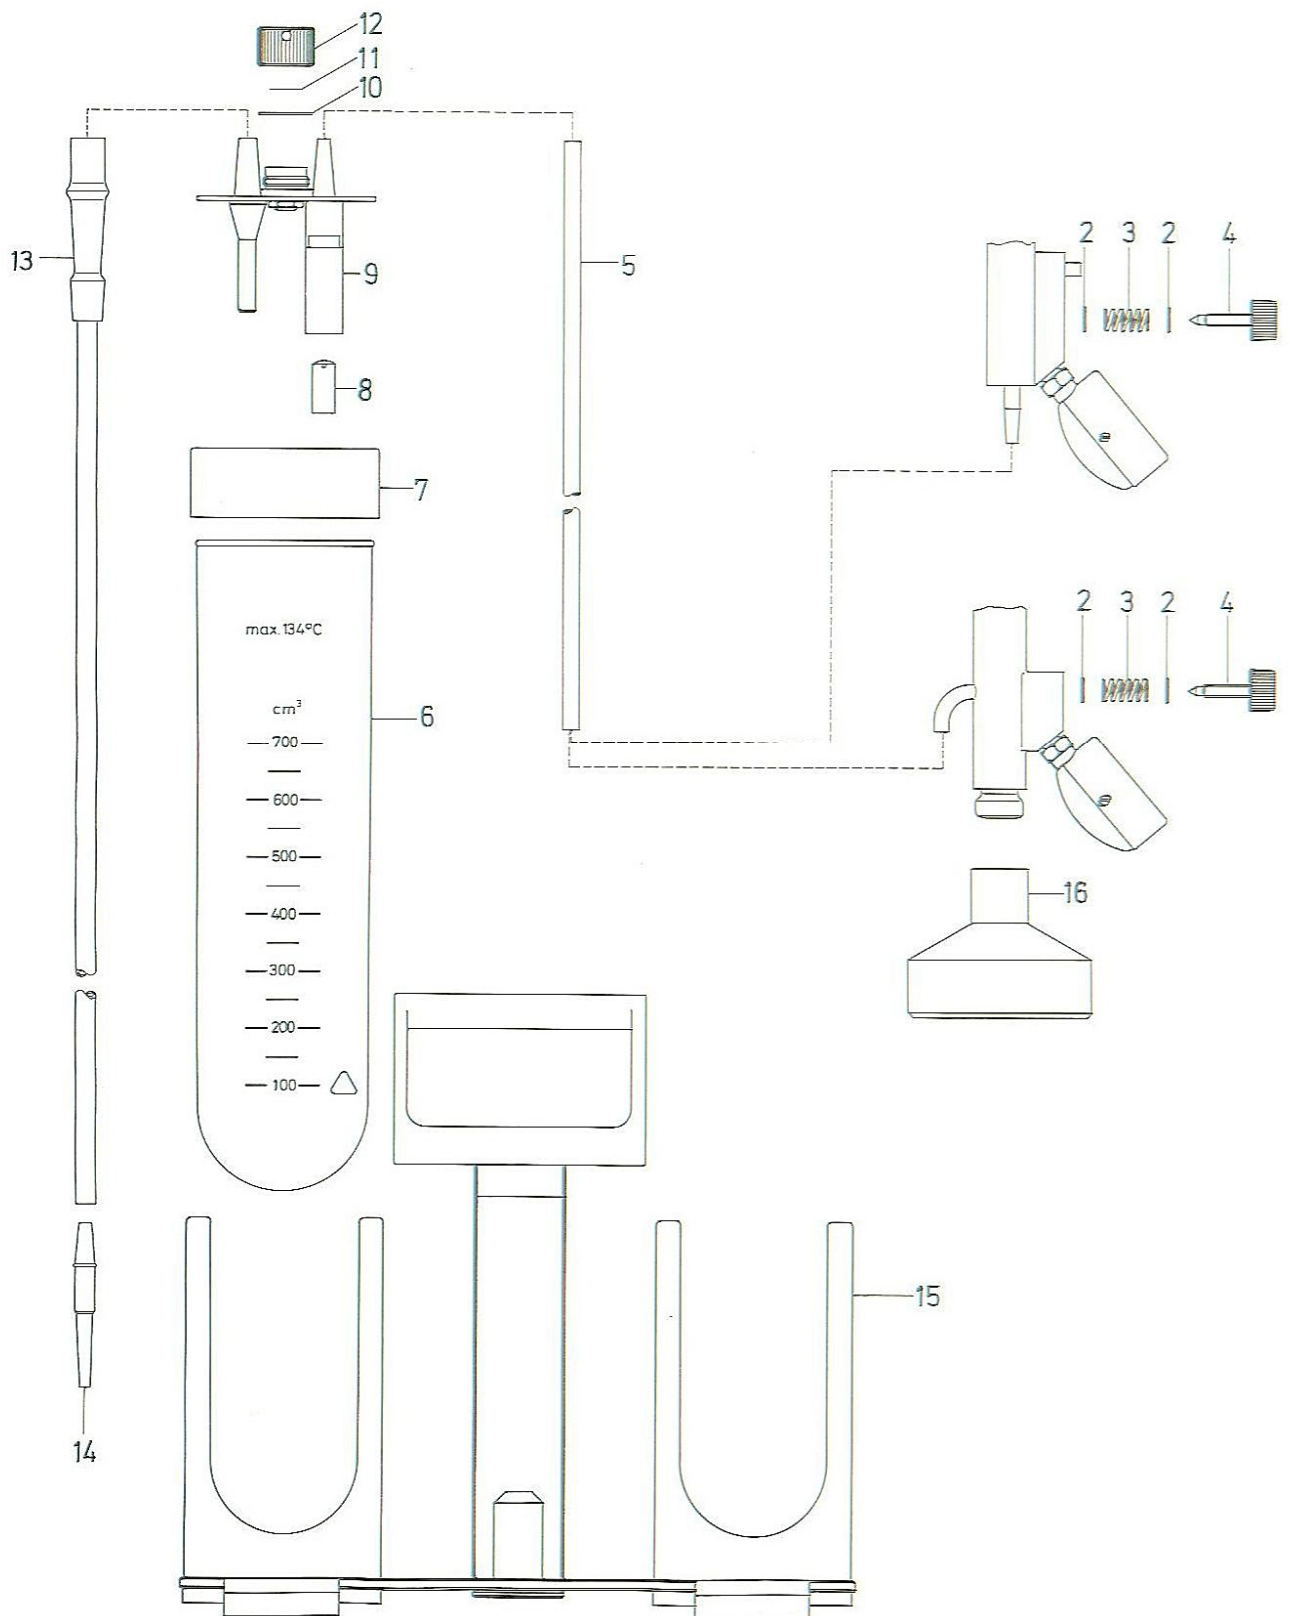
Spare and wearing parts (cf. Parts List on page 8)
